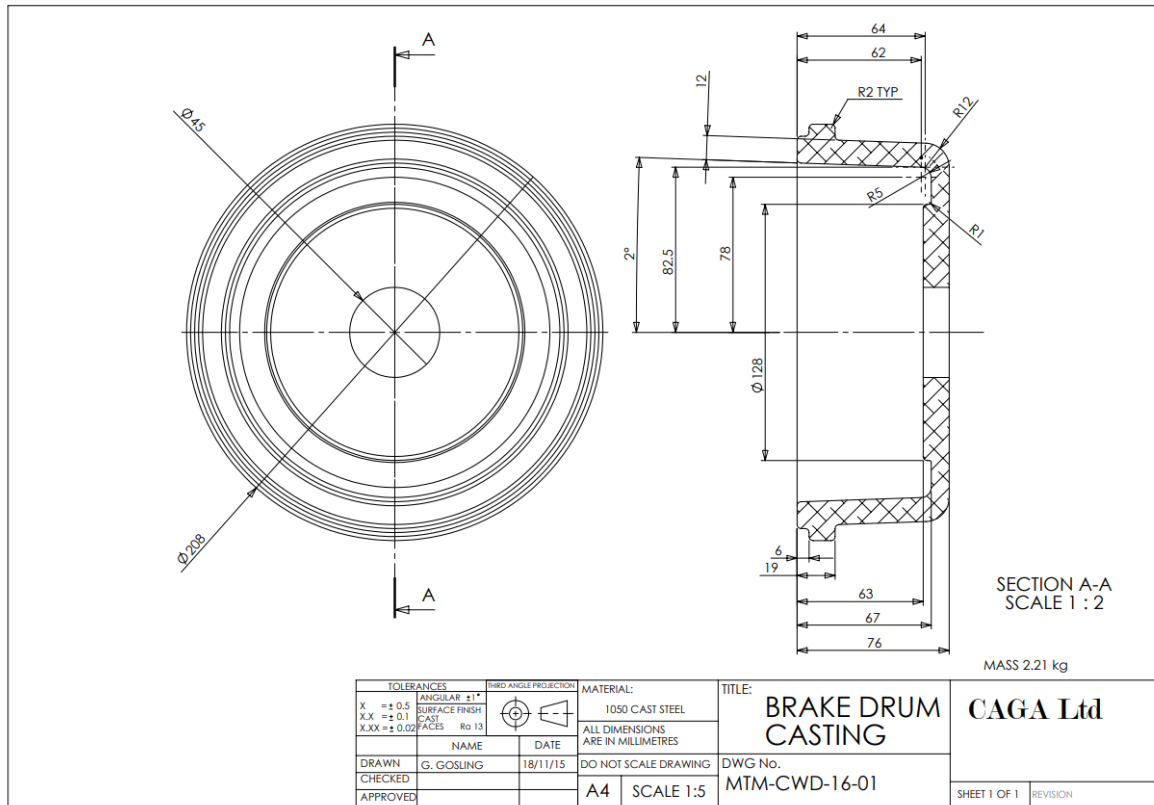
Technical Drawing of the supplied Brake Drum Casting
